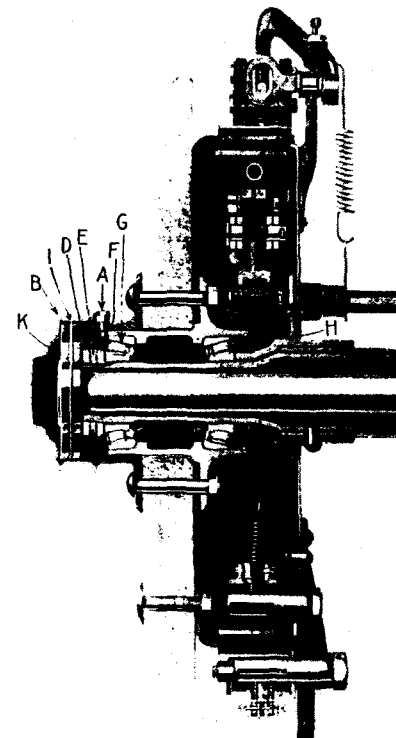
Sectional View of Rear Hub, Showing Bearings.
